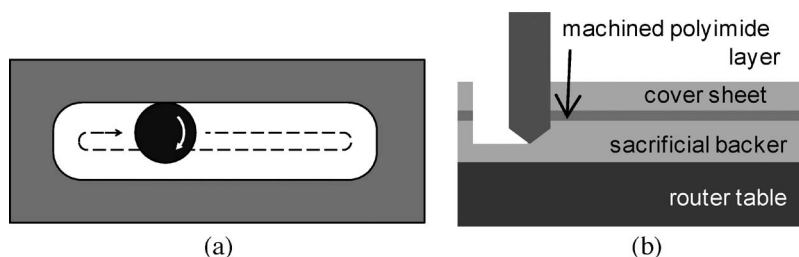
(a) Milling of a channel using only conventional cutting to avoid climb cutting. The solid arrow shows the top-view rotation of the tool; the dashed arrow shows the tool path. The finished part is shaded, while the through cut is shown in white. (b) Typical material stack used for machining single layer of polyimide (cover sheet required for thin layers only).
